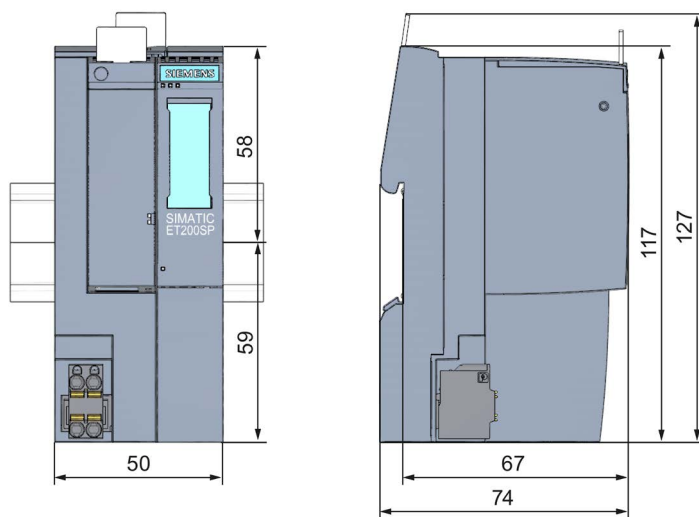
Dimension drawing of the IM 155-6 PN HS interface module (front and side view)
